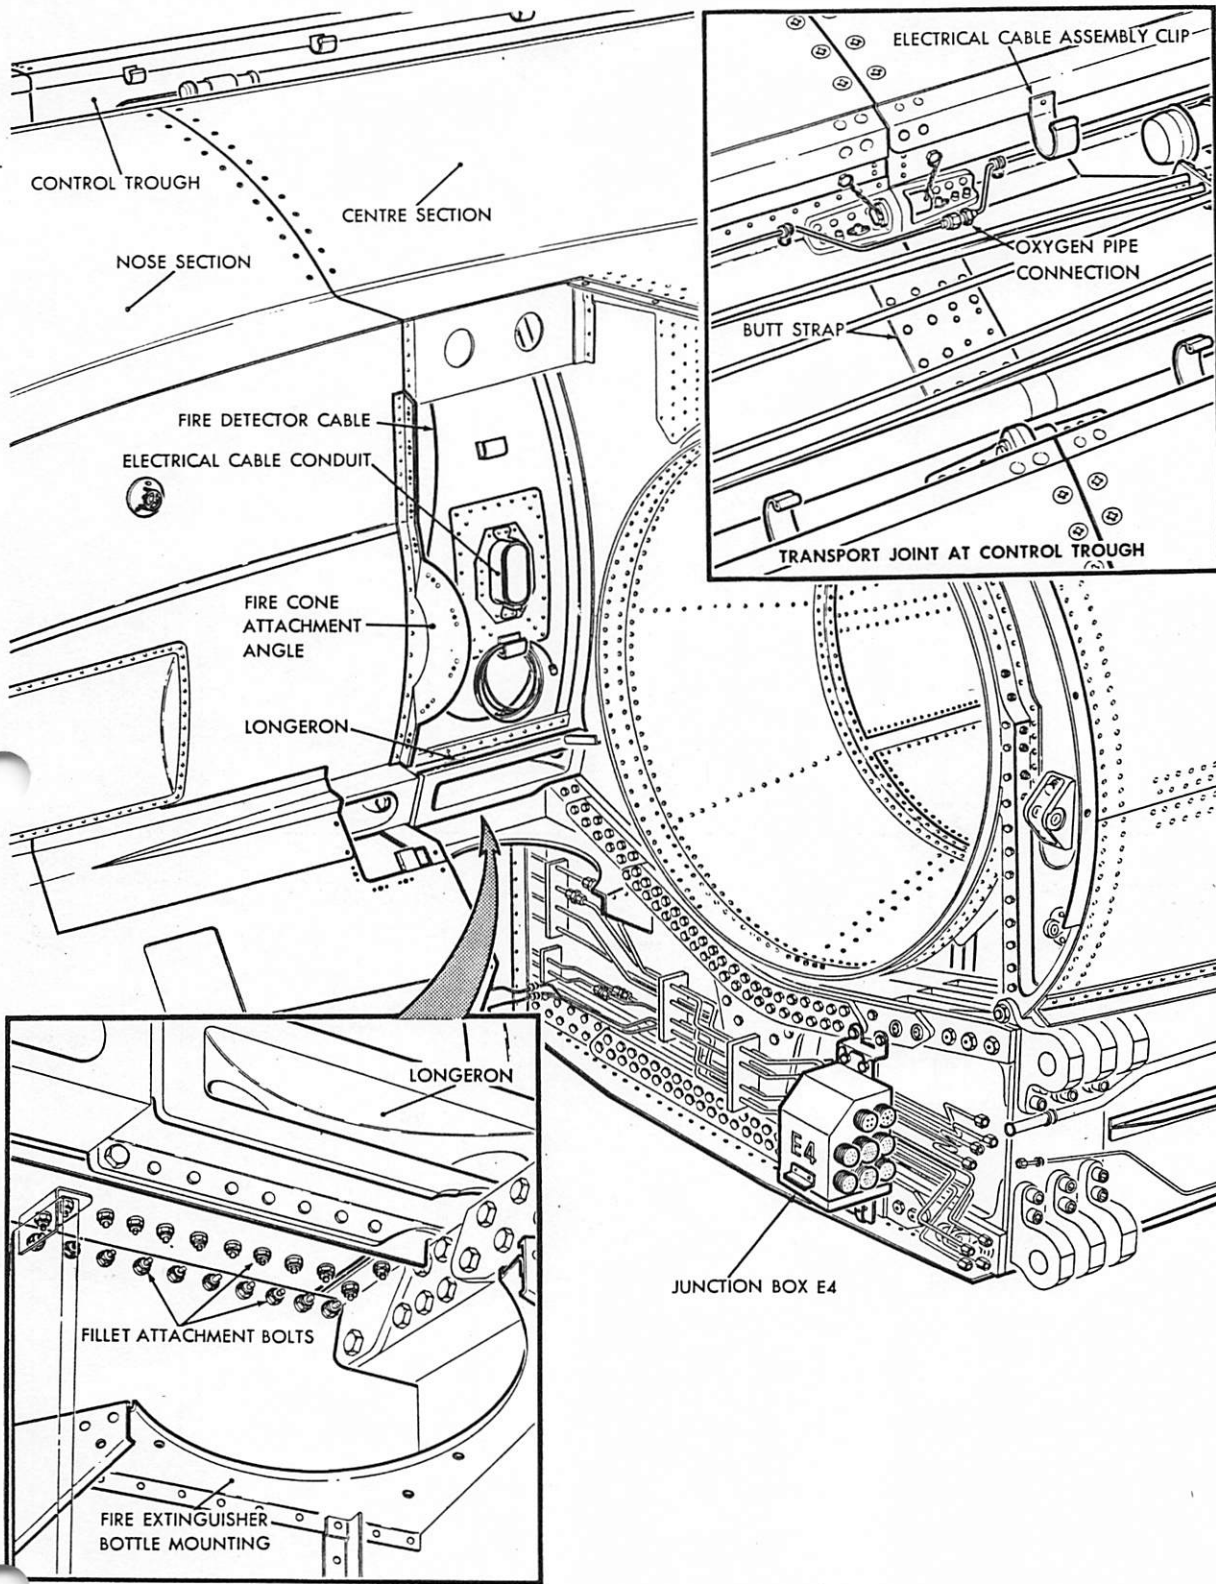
Transport Joint Details at Formers 13 and 13A
